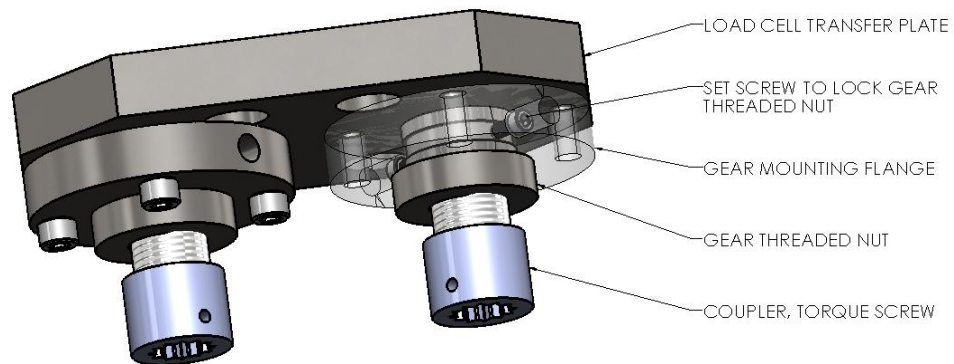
Load assembly mechanism to convert rotational to vertical movement.
